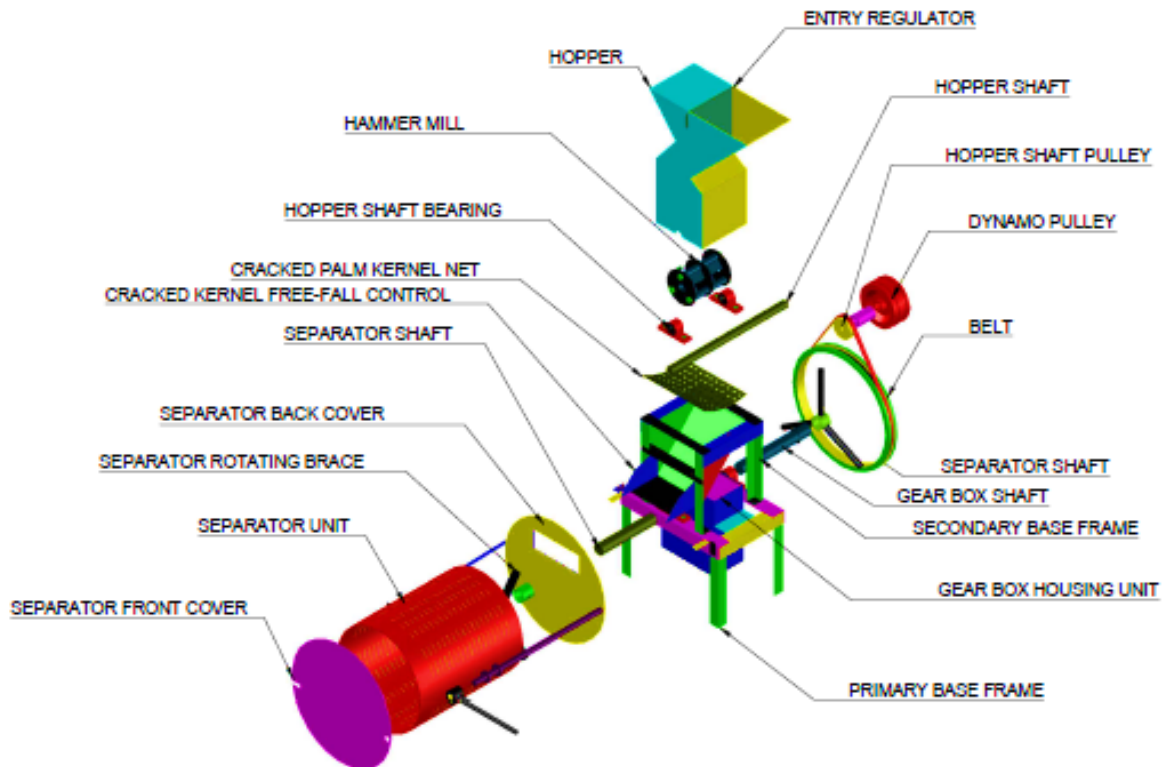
Exploded view of the Fabricated Palm Kernel Cracking and Shelling Machine
